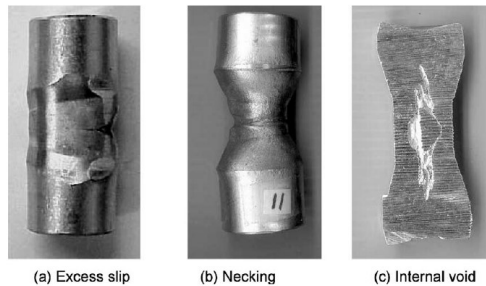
(Li et al., 2002) Examples of workpiece defects in CWR processes
